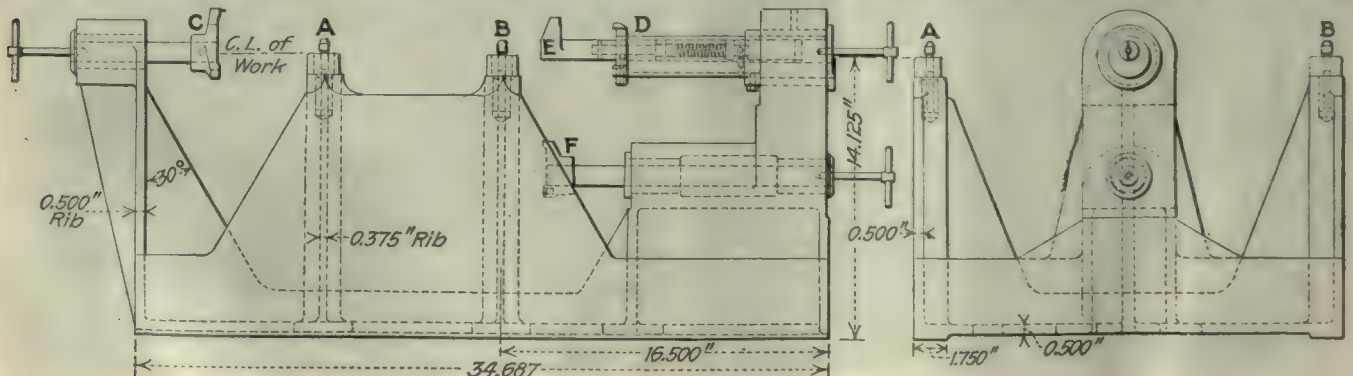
DETAILS OF THE INSPECTION FIXTURE
